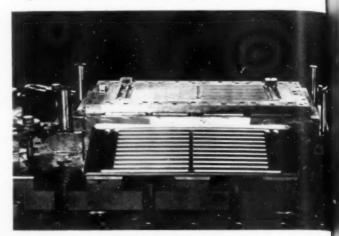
Shaping or sizing die made from a type 7 composition for evaporator parts. It is made from 0.042-inch thick cold rolled steel.
